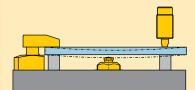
Simple hydraulic fixture with minimal workpiece deflection
